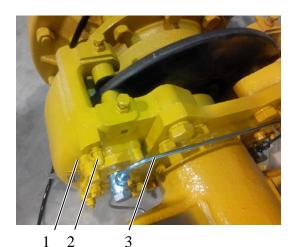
1 Brake caliper 3 Brake oil pipe
